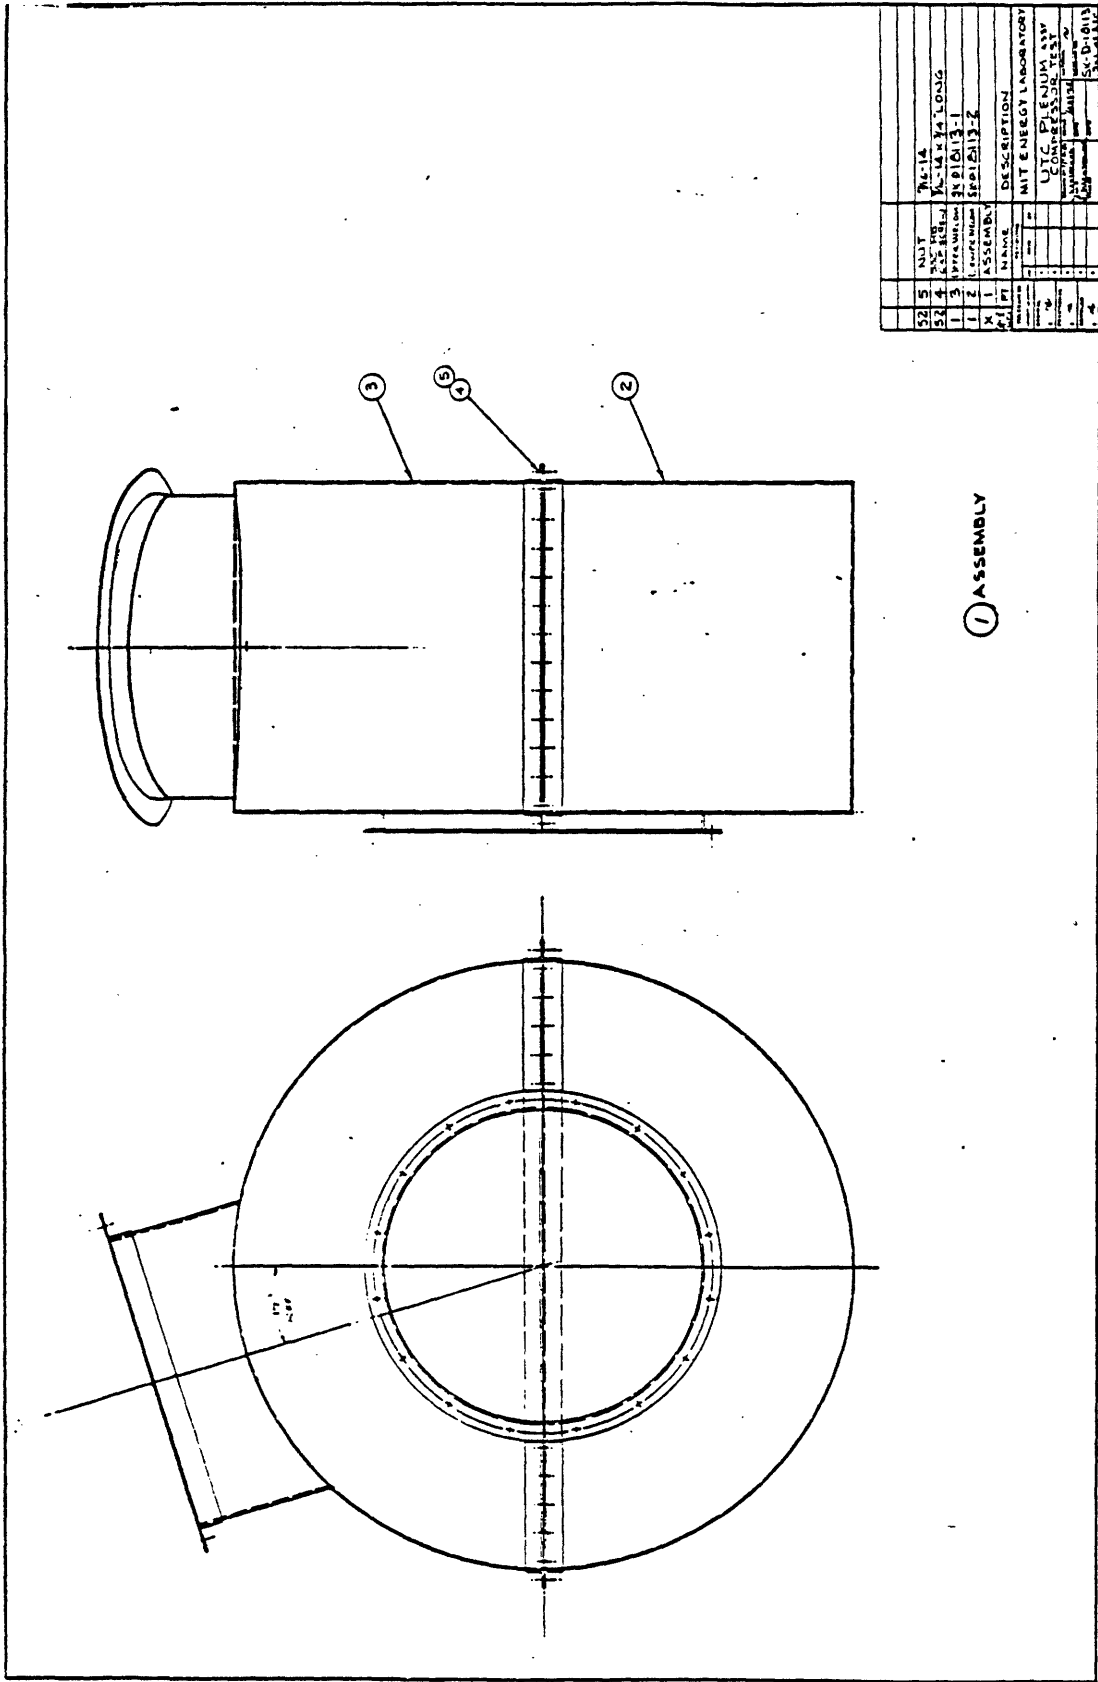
Assembly Drawing of Plenum for Three Stage Compressor
